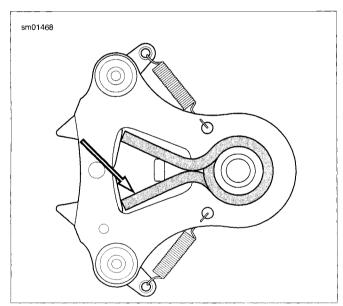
Shifter Shaft Return Spring (Incorrectly Installed)
